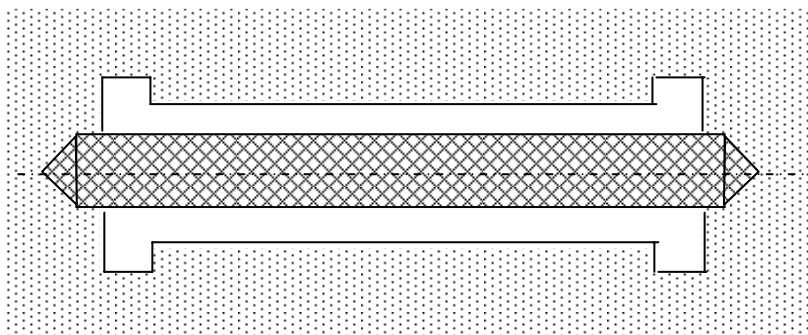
The scheme to illustrate the braking of the shrinkage at a jack with flanges.
